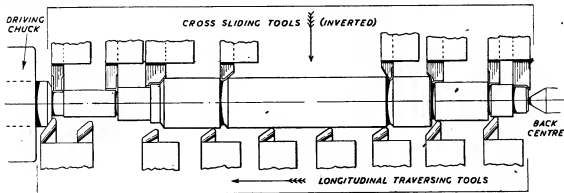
Method of machining a dynamo shaft on the "Maxicut" lathe.
